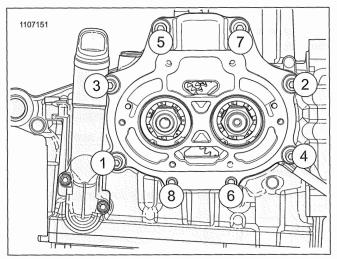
Transmission Bearing Housing Tightening Sequence
